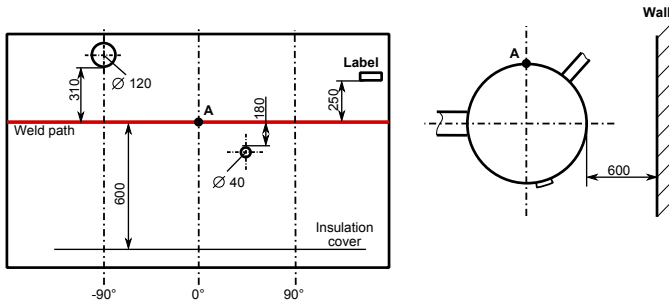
Typical drawing of pipe weld using the Developed view.
